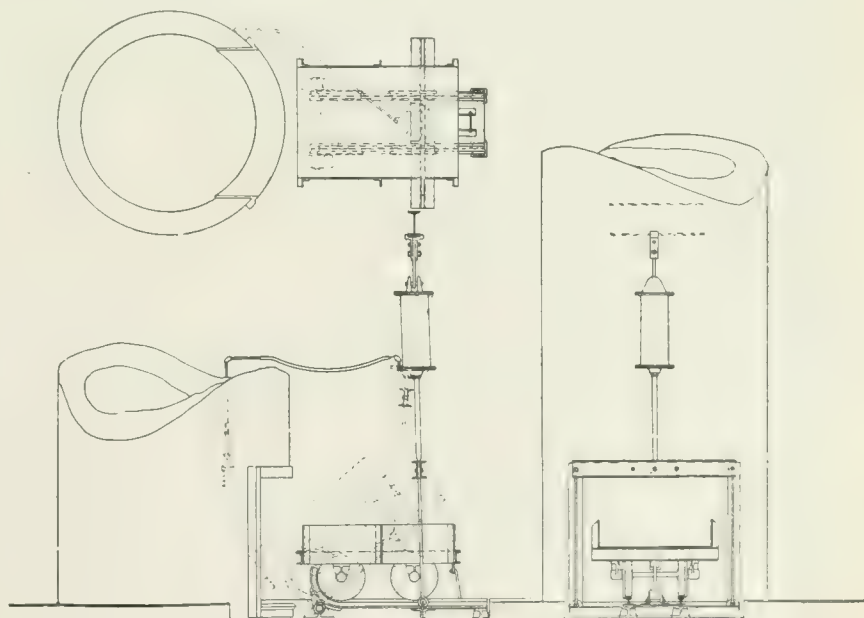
Side and End Elevations and Plan View of the End Dump Charging Machine.
